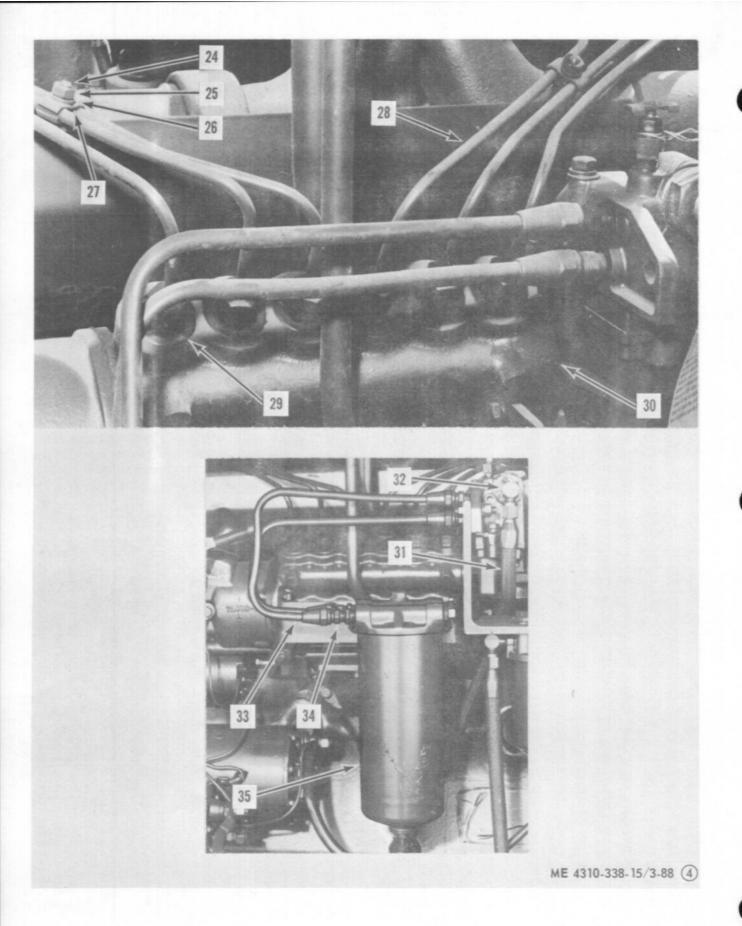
Fuel lines and fittings, removal and installation (sheet 4 of 4).
